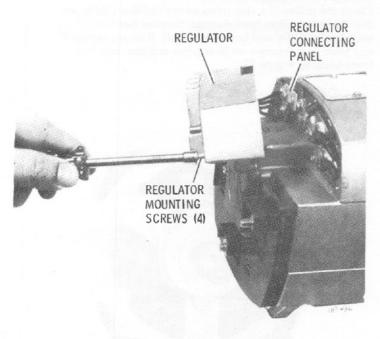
REMOVAL OF VOLTAGE REGULATOR
